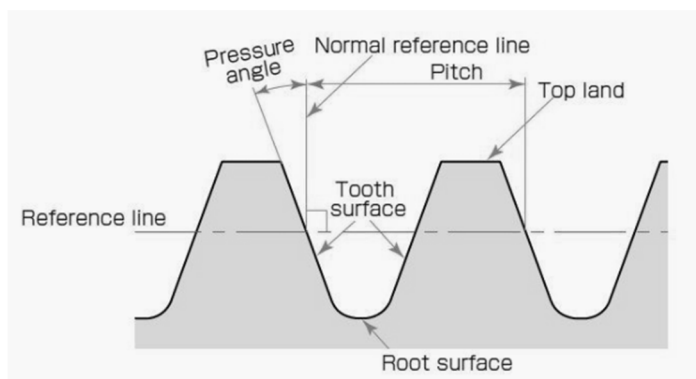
Pitch (p) & Pressure angle(a) of gear tooth
